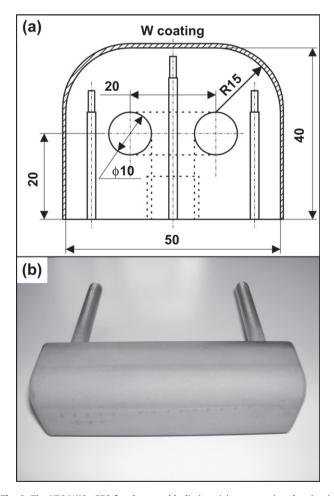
The VPS-W/Cu PFC for the movable limiter, (a) cross-section drawing in units of millimeter; (b) picture showing W coated surfaces and SS tubes for cooling water [4].
